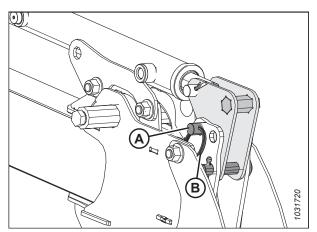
Fore-Aft Cylinder Adjustment Type 1 – Aft Position
